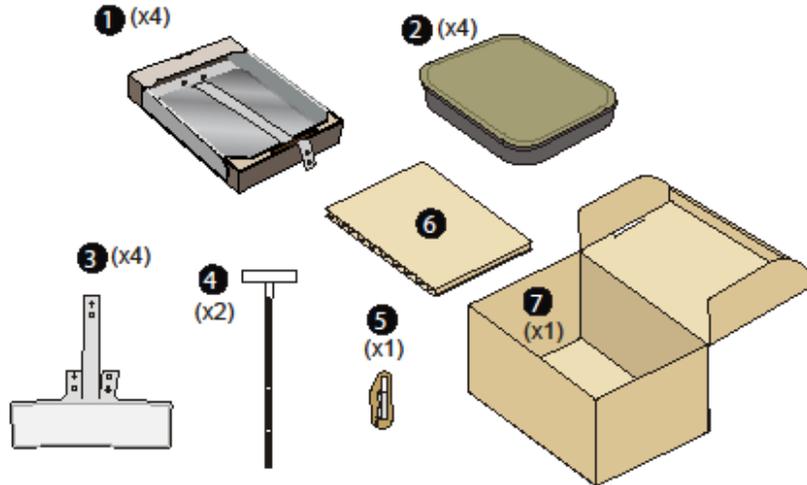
Assembly Instructions for UGR-E Heater Module
